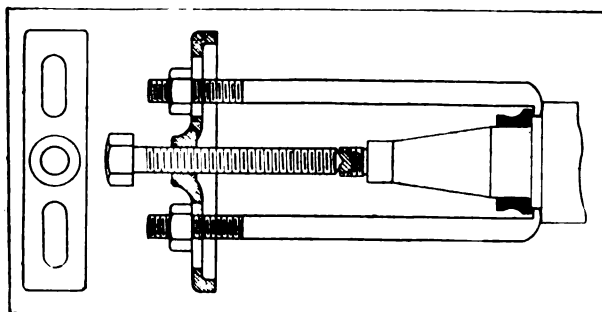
Bearing races should not be driven from the axle but should be removed with an adjustable puller
